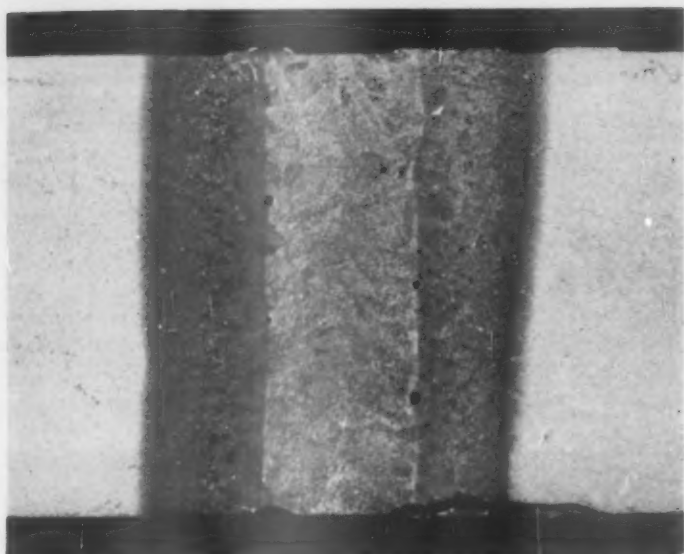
Surface of Ti-4Al-3Mo-1V Sheet After Heliarc Welding and Etching Showing Weld and Heat Affected Zone.
